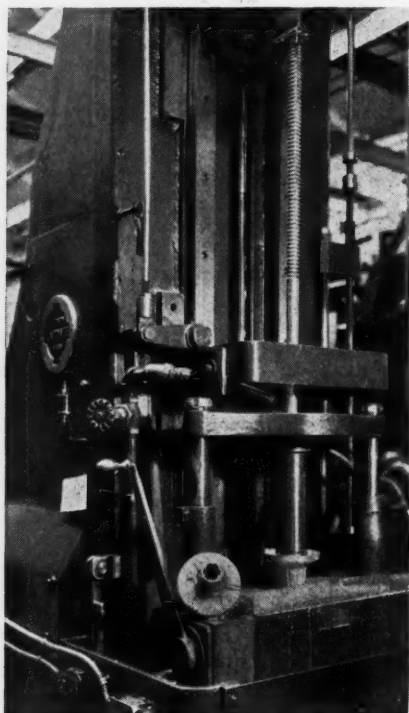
Vertical broaching machine with agitator drive cap in position for broaching splines. A finished cap can be seen at the left end of the fixture.
